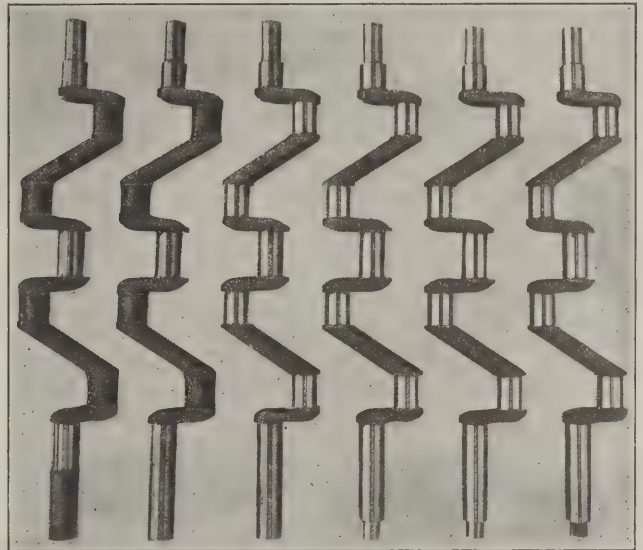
Crankshaft requiring practically No Lathe Work in finishing
